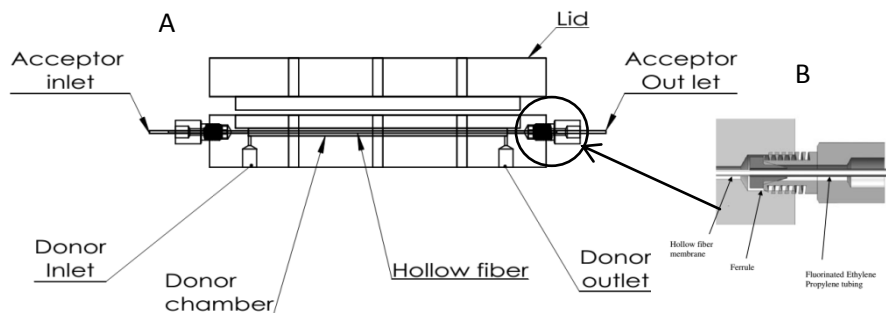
The improved design of easy assemble hollow fiber membrane unit A) side view schematic B) zoom fitting type port for hollow fiber membrane insertion
